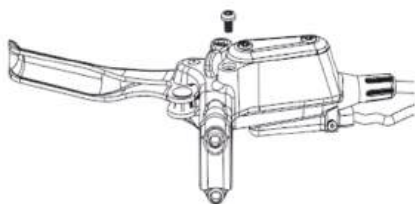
Remove the oil inlet screw from the disc brake master cylinder
